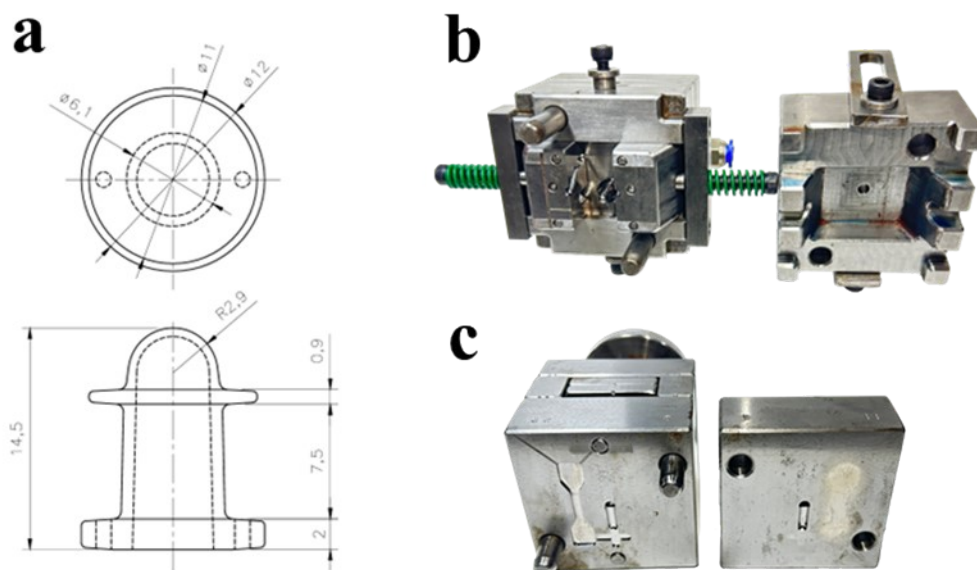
(a) Drawing of the generic indwelling voice prosthesis, (b) Injection molding tool fabricated for voice prosthesis, (c) Injection molding tool for dog bone specimen.
